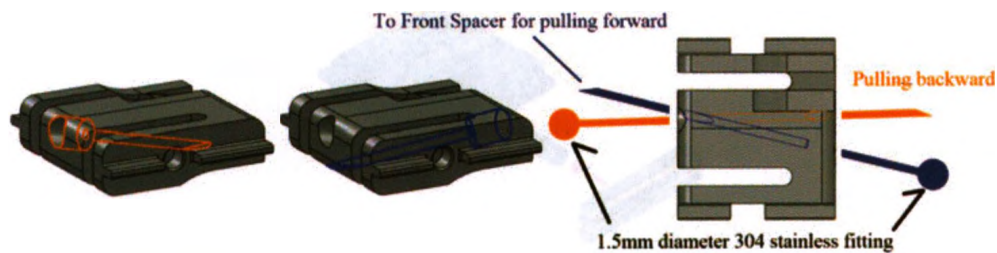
Cable routing of the Front Slider. One cable pulls the slider backwards, the other loops around joint Front Spacer (Figure 3.10) to pull the slider forward.
